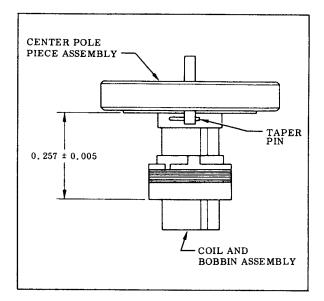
Coil and Pole Piece Assembly, Tolerance
